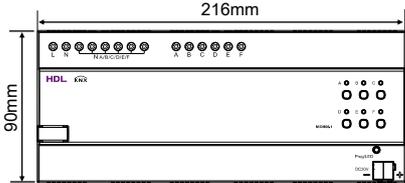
KNX 6CH 1.5A MOSFET Dimming Actuator
